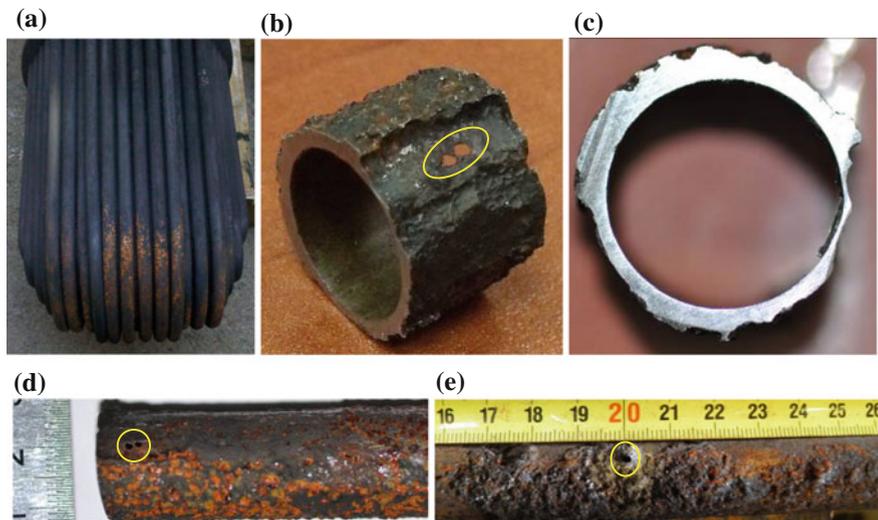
a General view of failed tube bundle. b Failed tube with two holes under the “step” (stair). c Macroscopic cross-section perpendicular through the tube near the holes. d Failed tube with two holes (~ 2 mm). e Failed tube with a hole (~ 2 mm)
